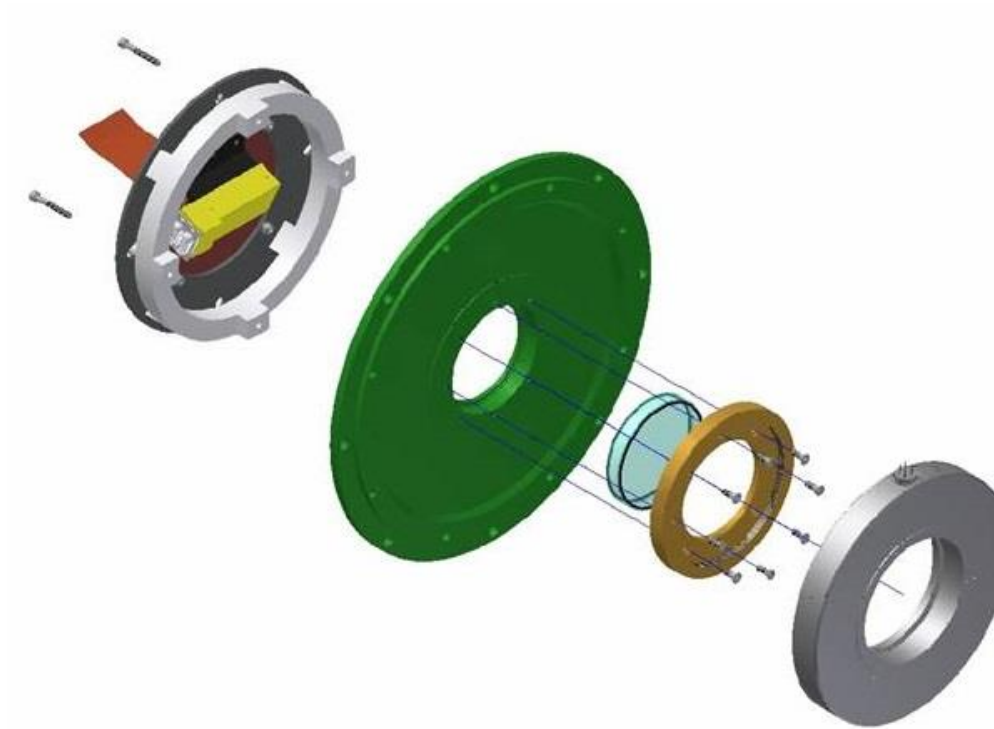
parts diagram of the flange together with the glass window and the detector mounting
